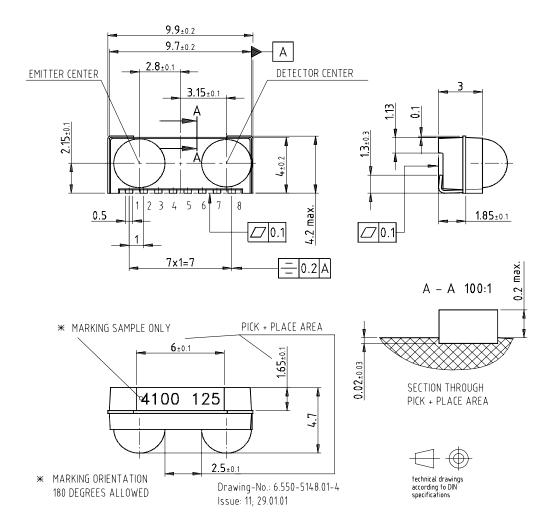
Package drawing TFDU6102, dimensions in mm, tolerance ± 0.2 mm if not otherwise mentioned
